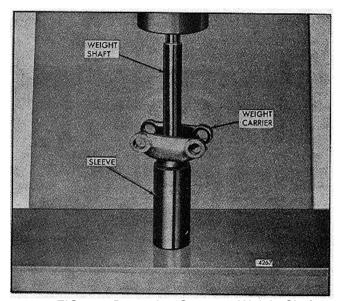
Removing Governor Weight Shaft from Weight Carrier
